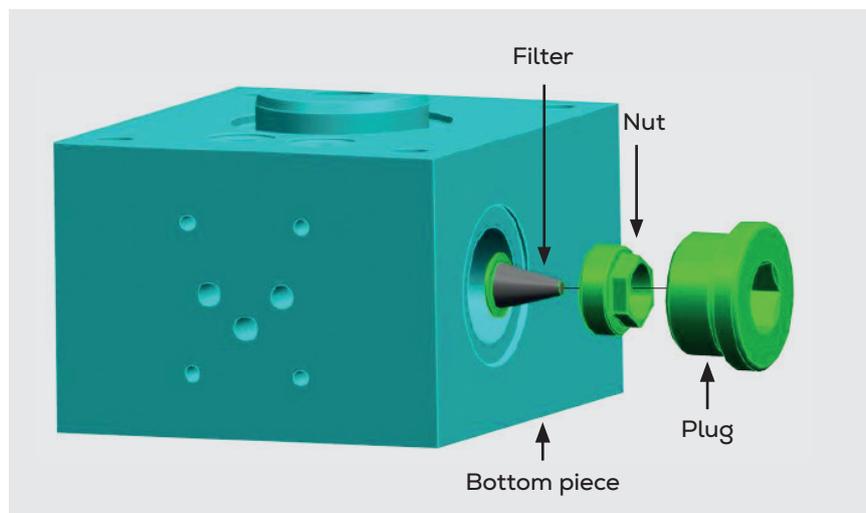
New bottom piece showing the safety screen filter placement and assembly order
